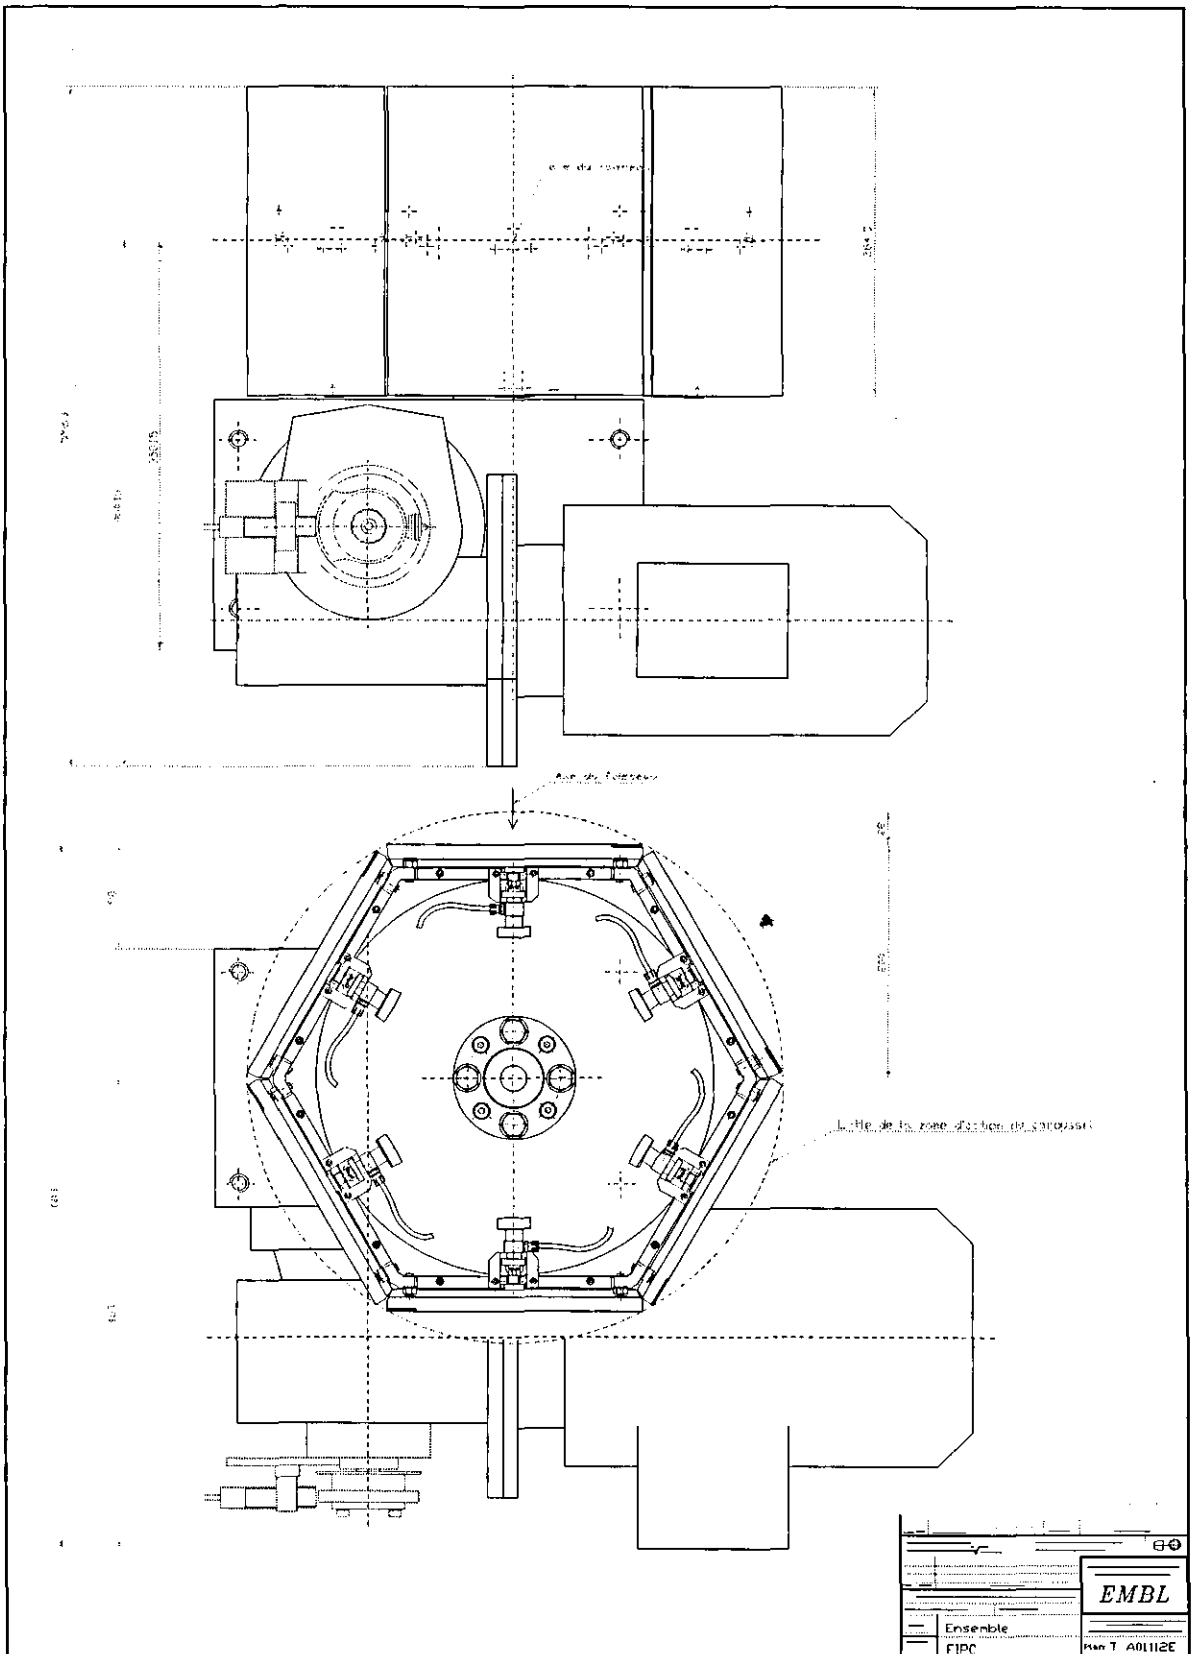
Technical drawing of the detector, showing the cassettes mounted, and the indexed rotation table [54]
